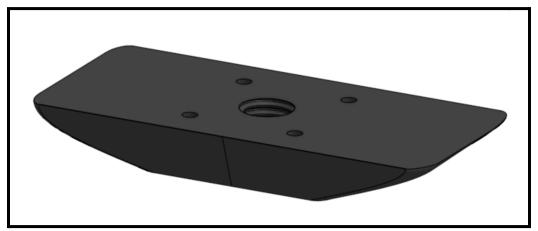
The in-vivo rod arm attachment component is depicted in a front-top isometric view. Threading can be seen through the center hole.
